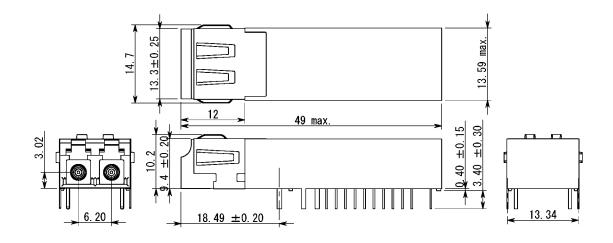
Outline Dimensions (SCM6012-GL-CN/CW)
